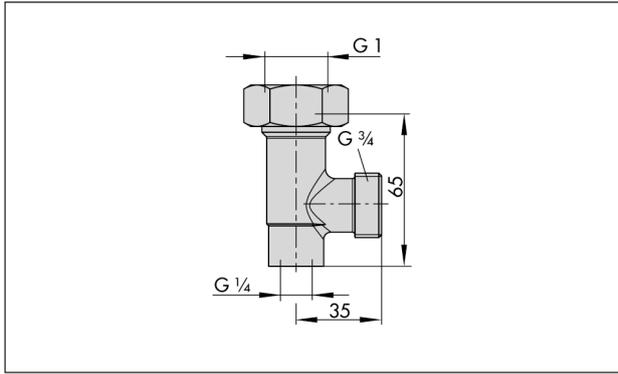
Sensor pocket (including gasket) for heat exchanger with G 1
